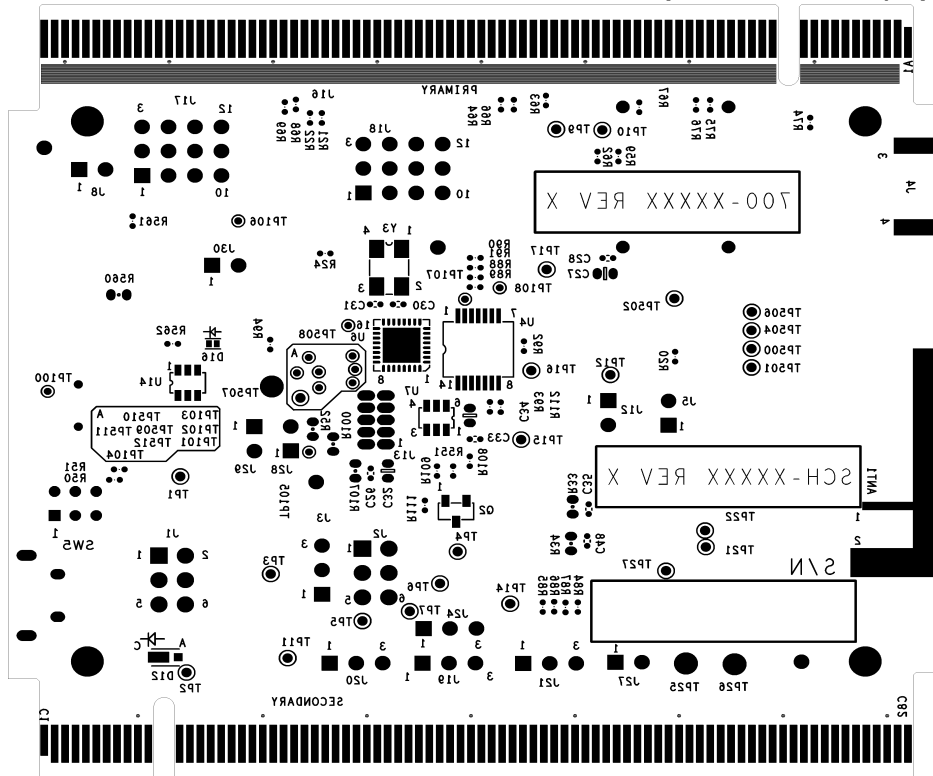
TWR-KW24D512 Reference Board PCB Test Points
